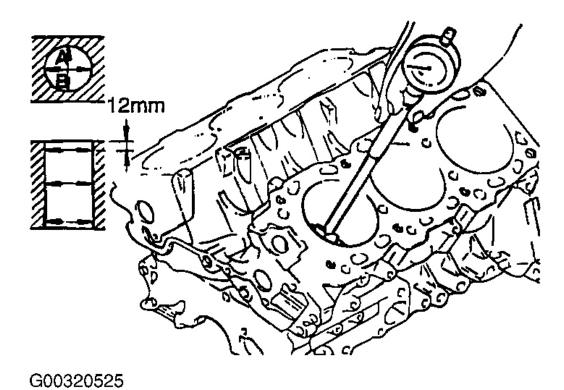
Measuring Cylinder Bore Courtesy of KIA MOTORS AMERICA, INC.
